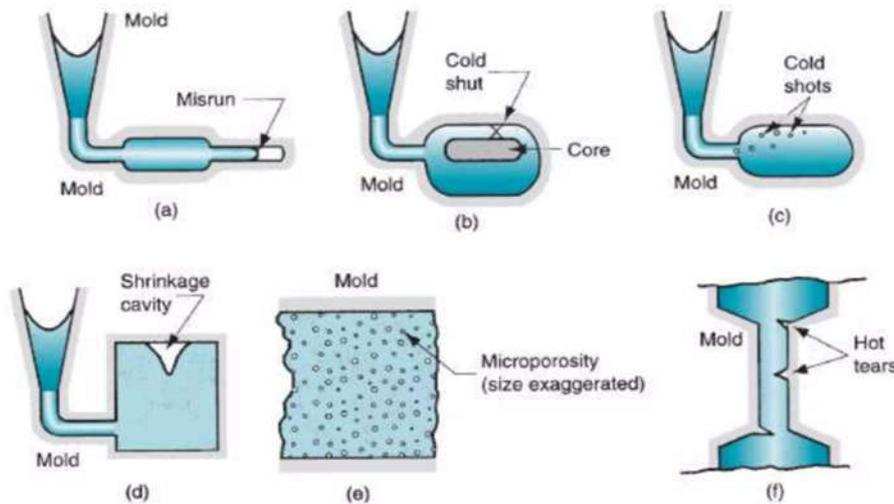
Casting Defects Related to Gating System Design [2]
